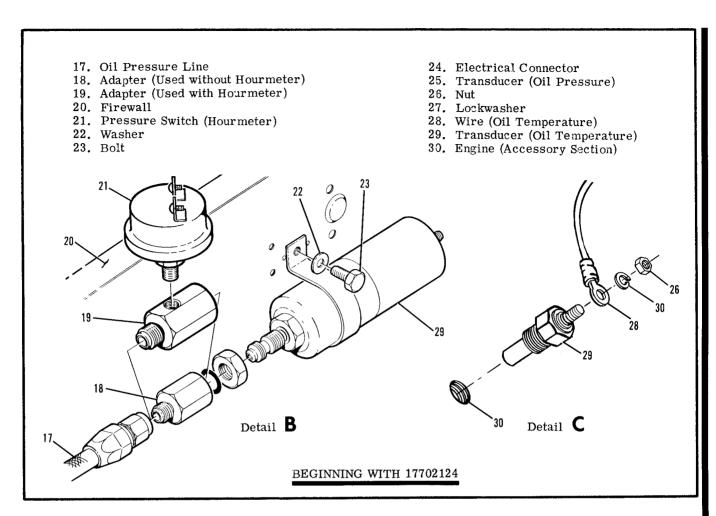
A. Engine Instrument Installation (Leigh System) (Sheet 2 of 2)
